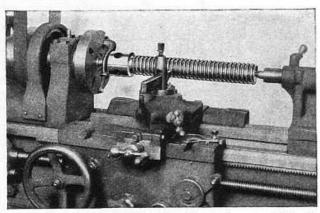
Cutting a Square Thread on a 16-inch New Model South Bend Screw Cutting Lathe
